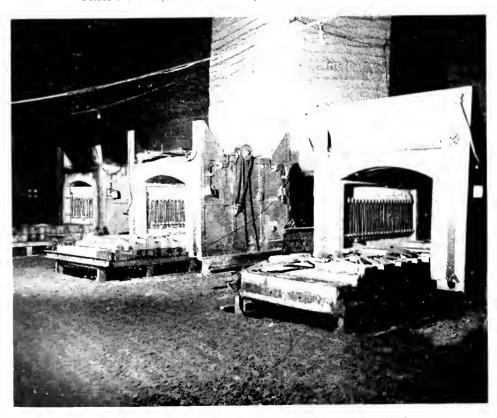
Heat treatment shop, Tomura plant at Oya Works.
